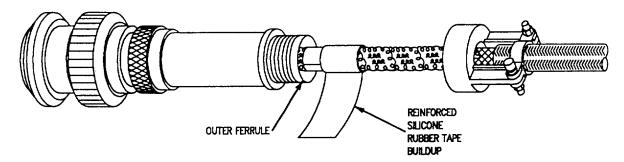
Slip Saddle Clamp Assembly Back onto Wire Bundle
